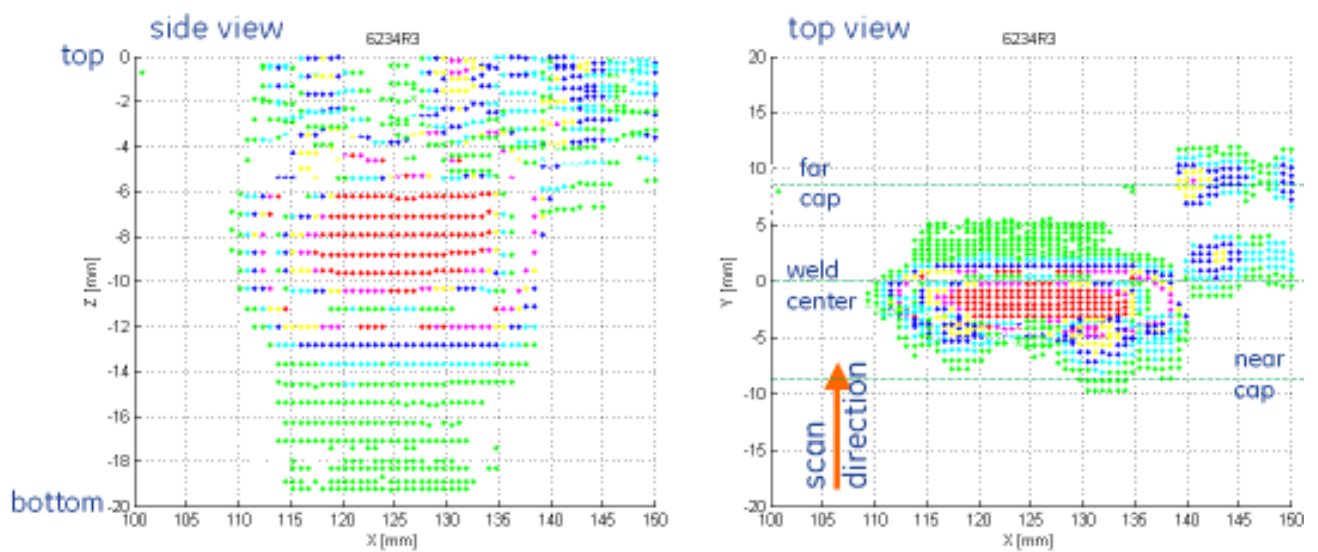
Side and top view of the lack of fusion defect (MATLAB)
